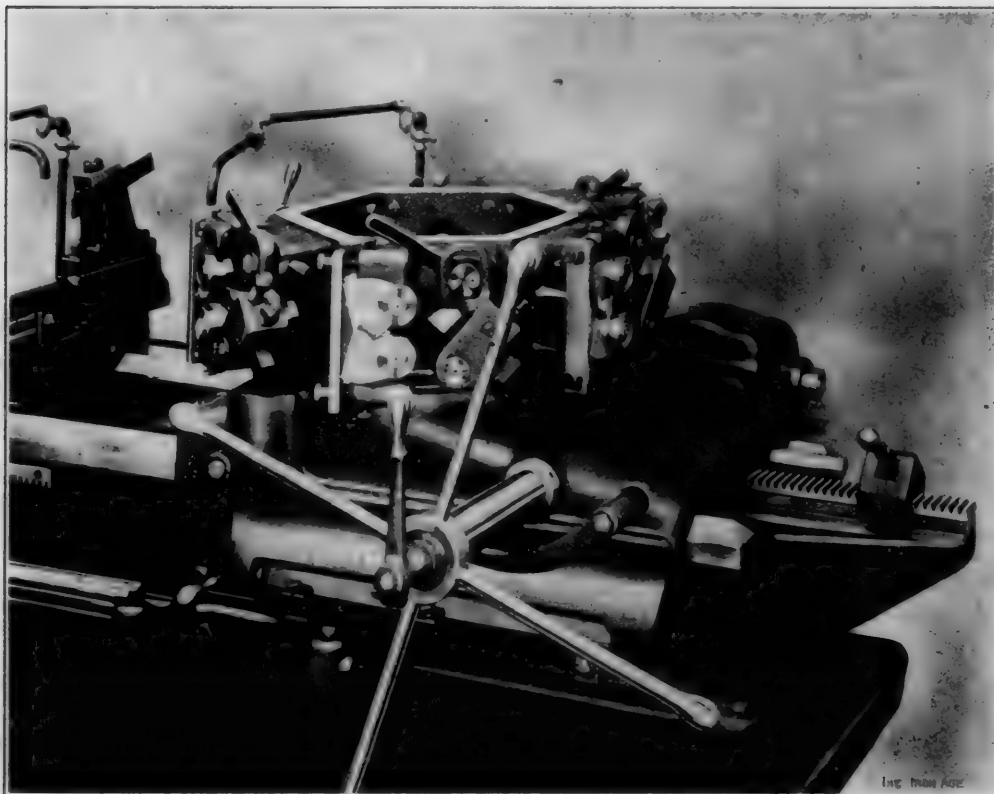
HOLLOW HEXAGON TURRET AND TOOL EQUIPMENT.
